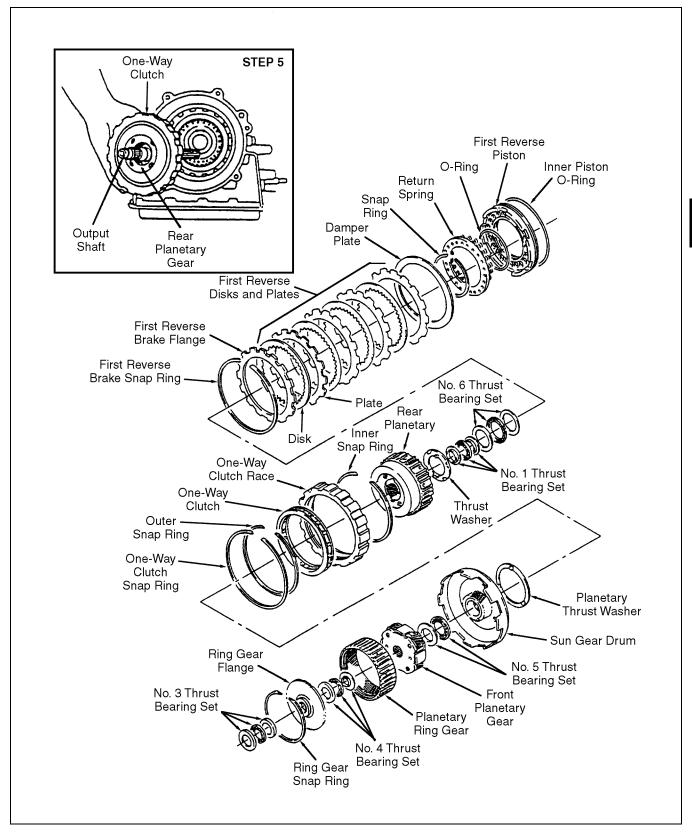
J-23. Planetary Gears and One-Way Clutch Disassembly
